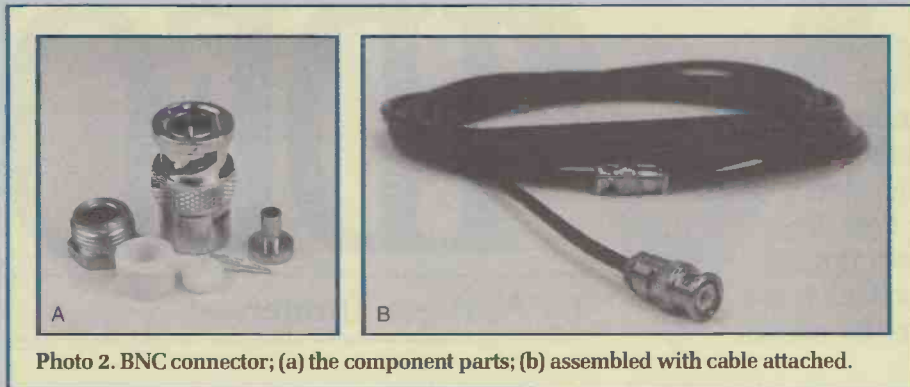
BNC connector; (a) the component parts; (b) assembled with cable attached.
